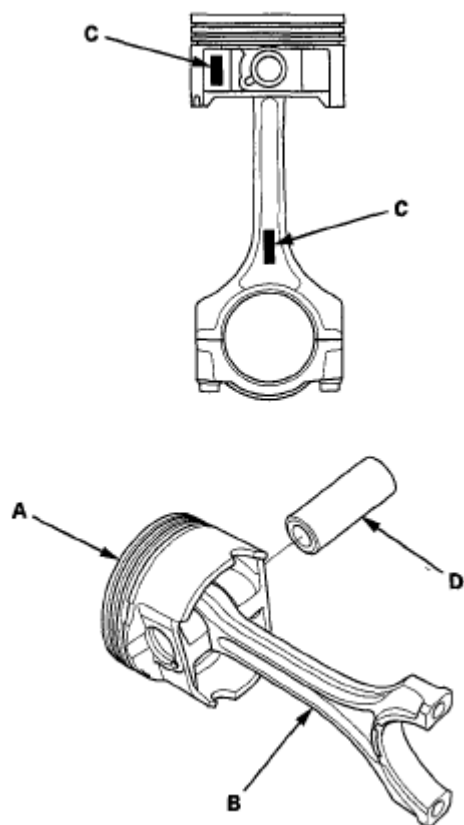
Identifying Piston, Connecting Rod, Embossed Marks And Piston Pin
